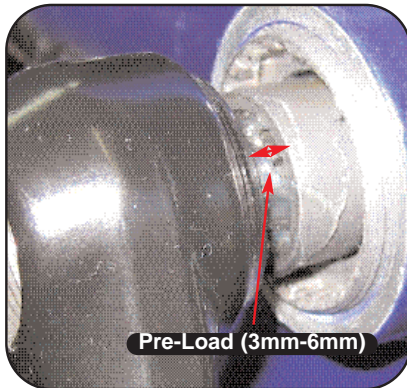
Powerspline crank arm installed by hand onto bottom bracket spindle. The distance between the crankarm stop-surface and the bottom bracket crank-stop is called "preload".
